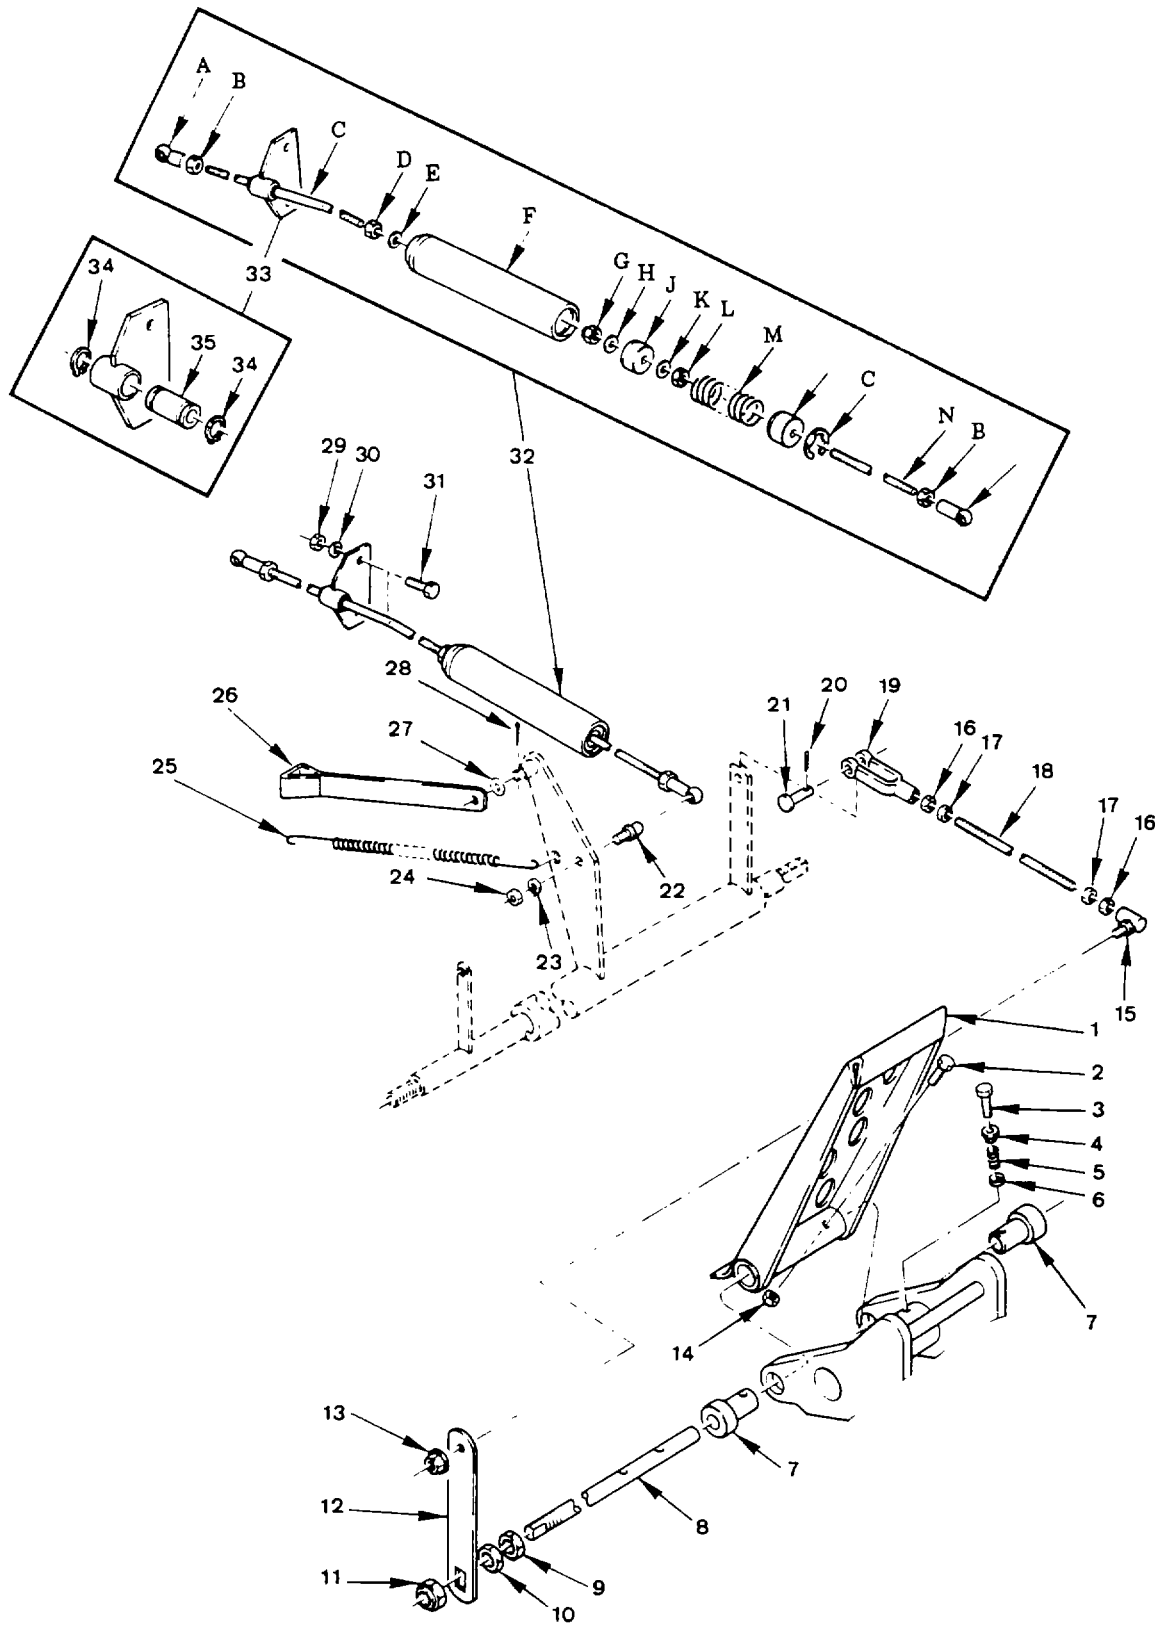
Repair of Accelerator Pedal, Pedal Linkage and Kickage and Kickdown Cable (Sheet 1 of 2).
